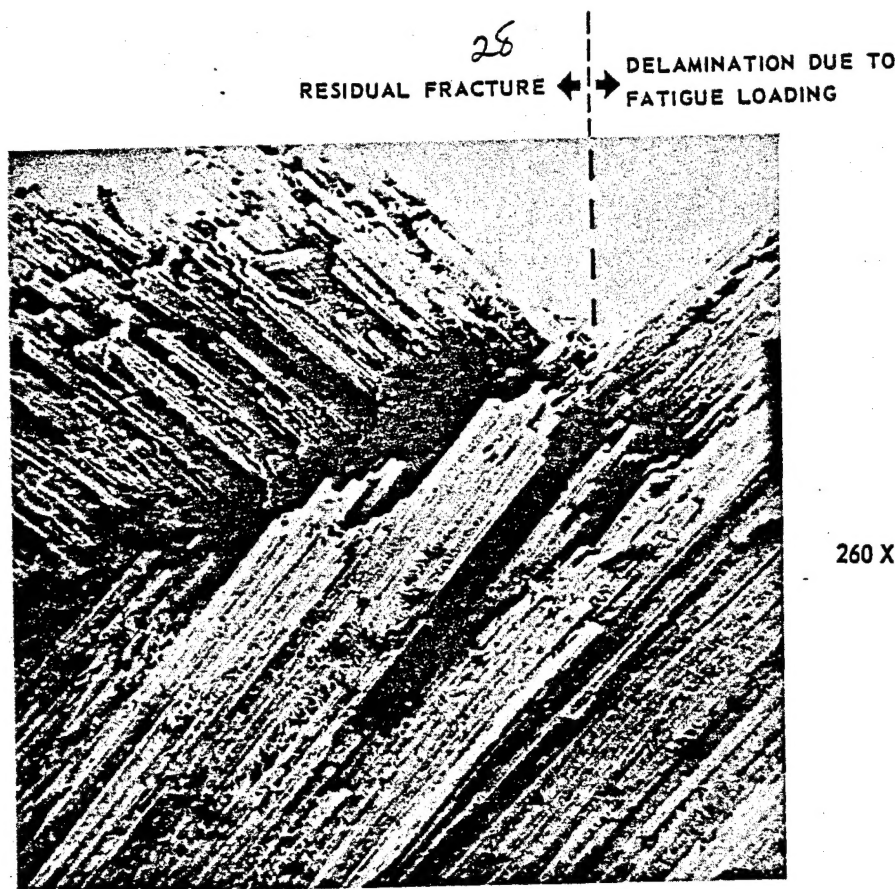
Transition of the zone with fatigue damage to that of residual fracture
